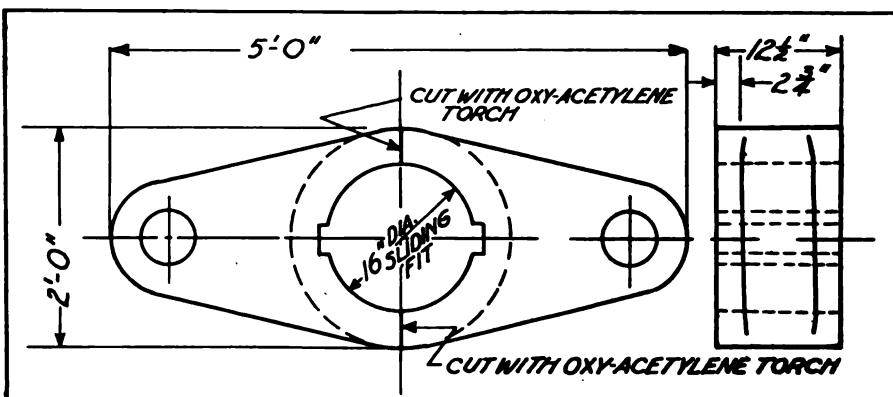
GENERAL DIMENSIONS OF LARGE CASTING WELDED WITH THERMIT
